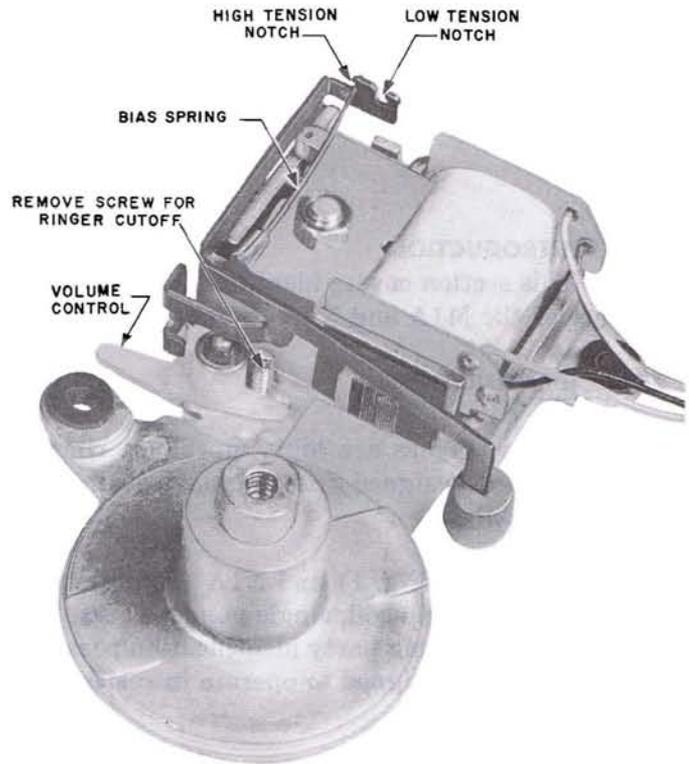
M1A Ringer, Gong and Resonator Removed
